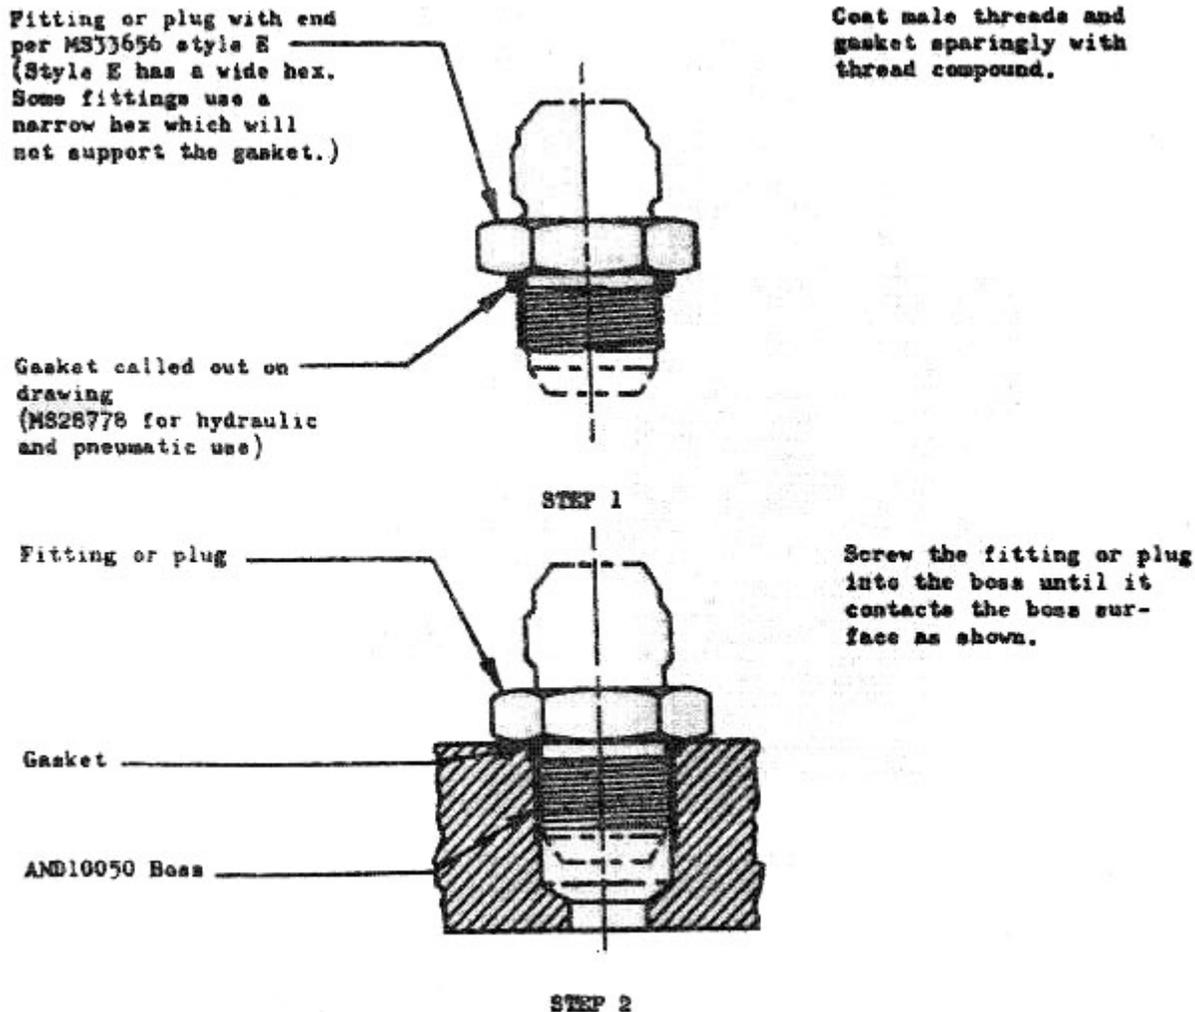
Installation of MS33656 Style E Fitting End Into AND10050 Boss
